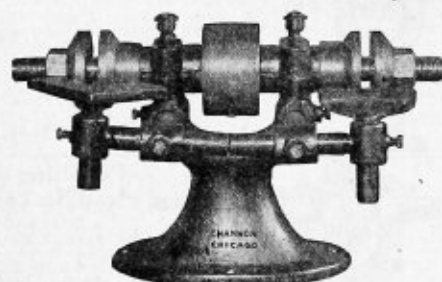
, Showing No. 2, 3 and 4 Grinder Head
